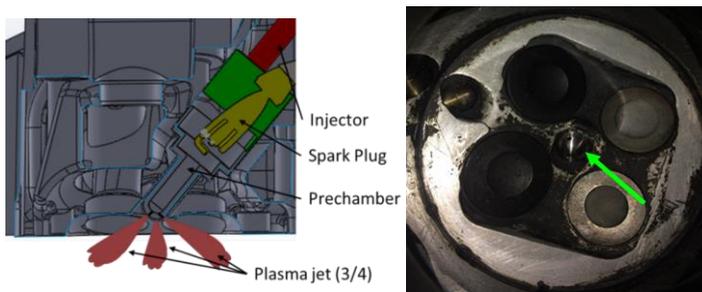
a) Section of the engine head equipped with prechamber, b) image of the prechamber tip in the central location of the head.
